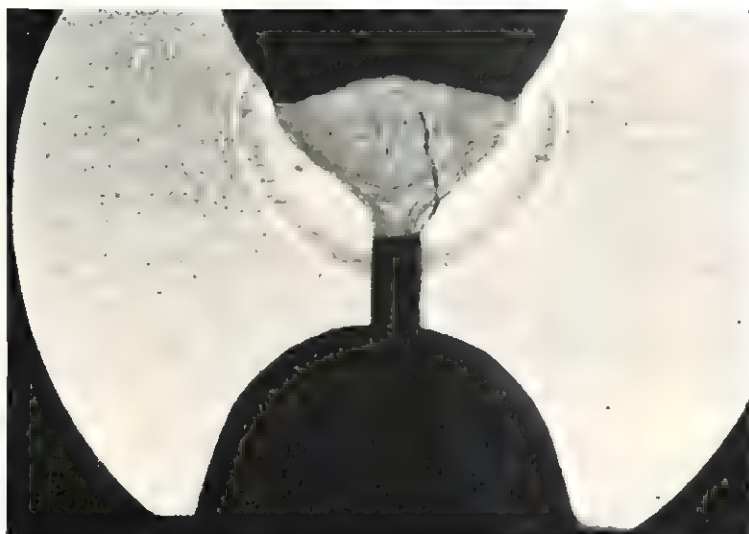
R.B.C. Macrospecimen. $\times 4$.
